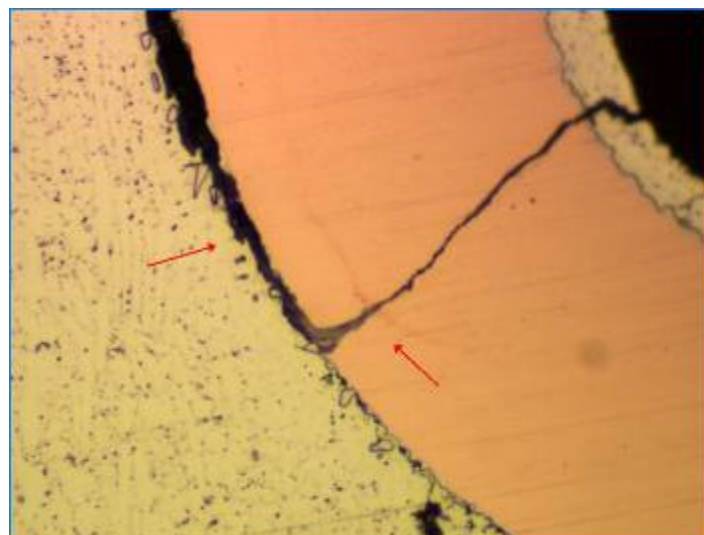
cross section, SN61, U20, right lead and solder crack, 400x
